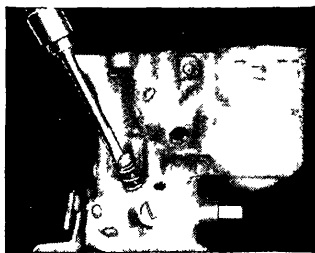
Remove idle adjusting screw and spring. Check for groove on seating surface
